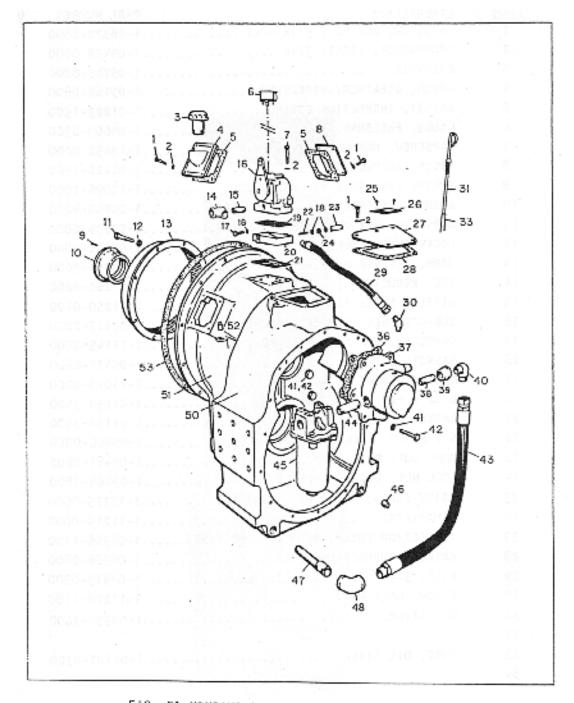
HOUSING AND RELATED PARTS HY-6900
